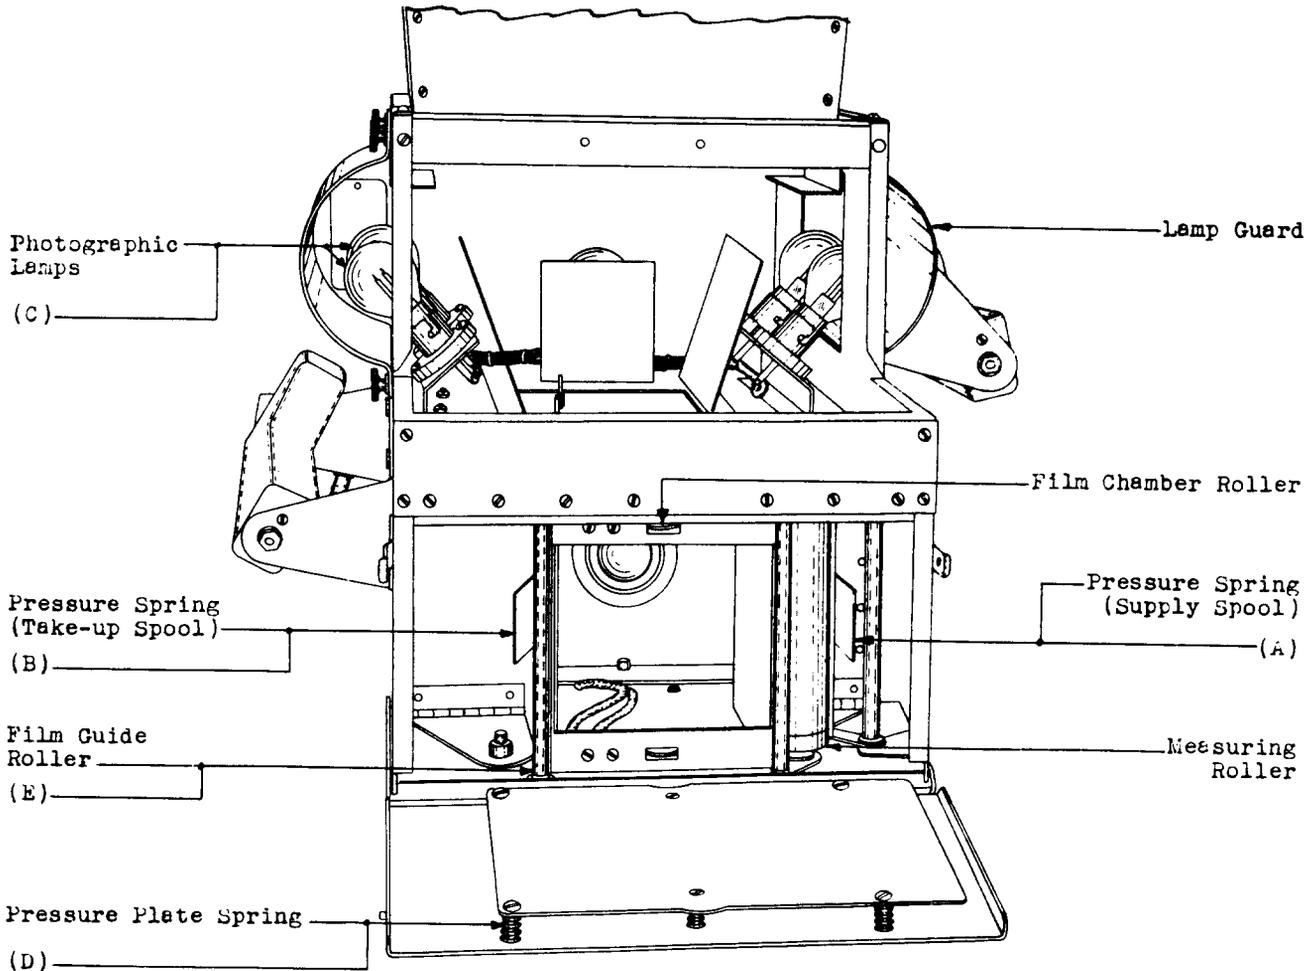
KS-8320 Camera - Film Chamber (Motor Drive Removed)
